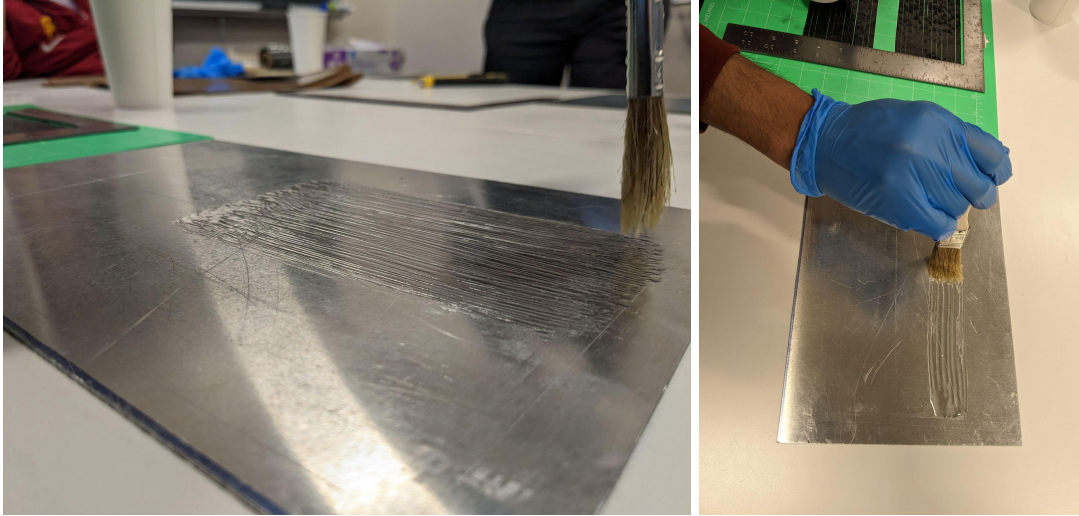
& 5: Coating/preparing of mold for the unidirectional carbon fiber sheets
